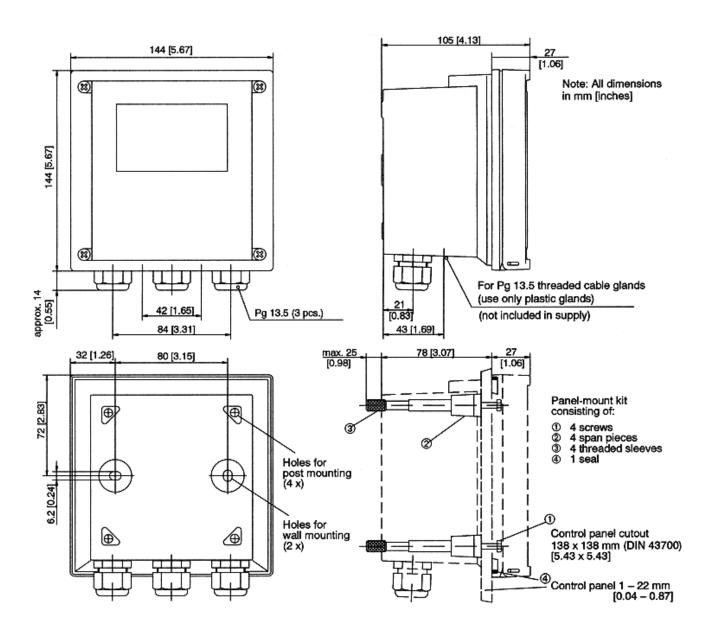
Dimension Drawing for APT2000 and P/N 51205990-001 Panel Mounting Kit
